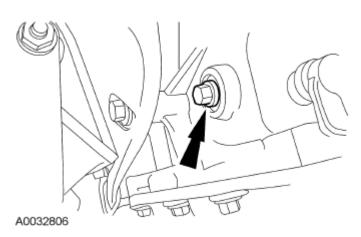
Locating Engine Plug Bolt Courtesy of FORD MOTOR CO.
